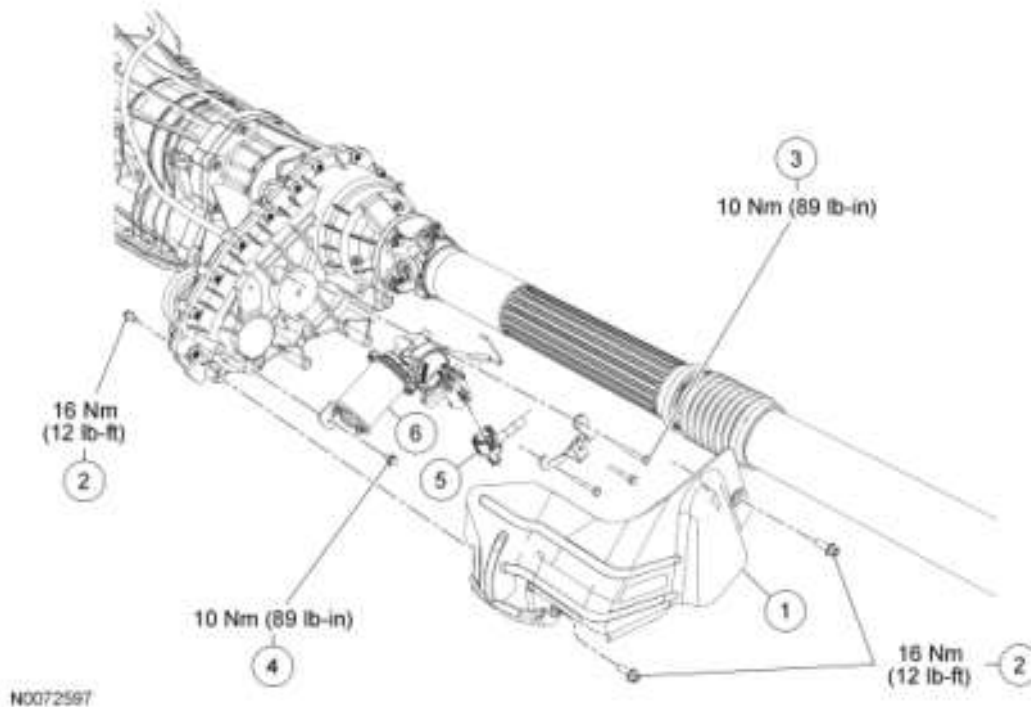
Exploded View Of Transfer Case Shift Motor With Torque Specifications
